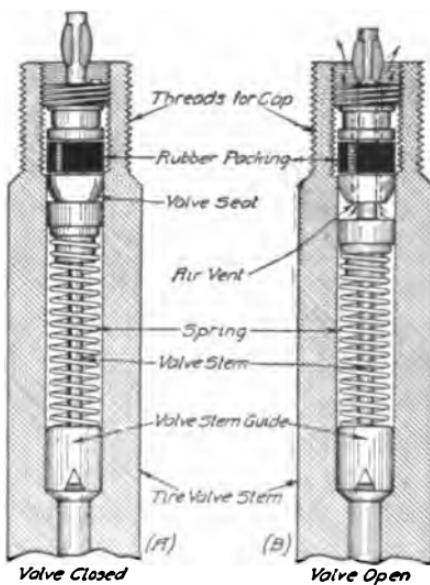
Views of Tire Valve Showing Closed and Open Positions
